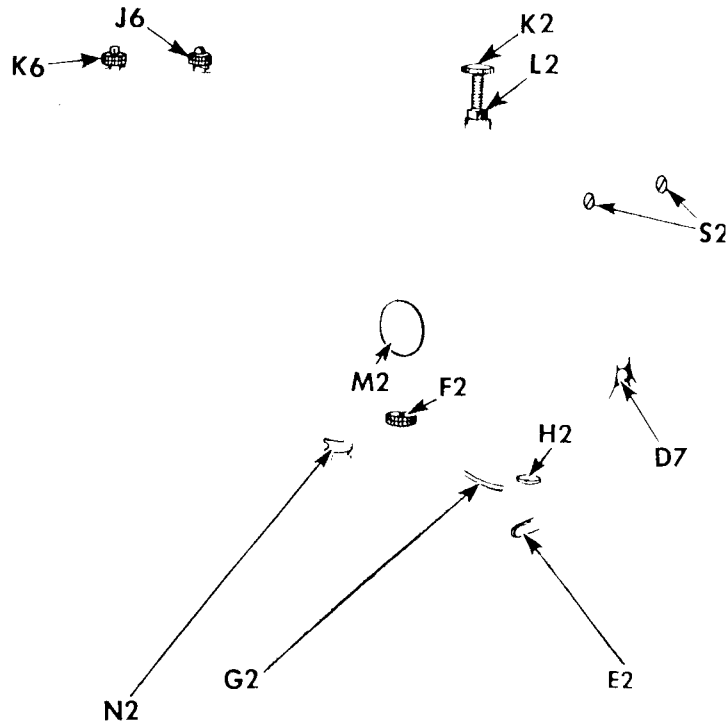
Regulating Thread Tensions and Pressure on the Button Clamp
